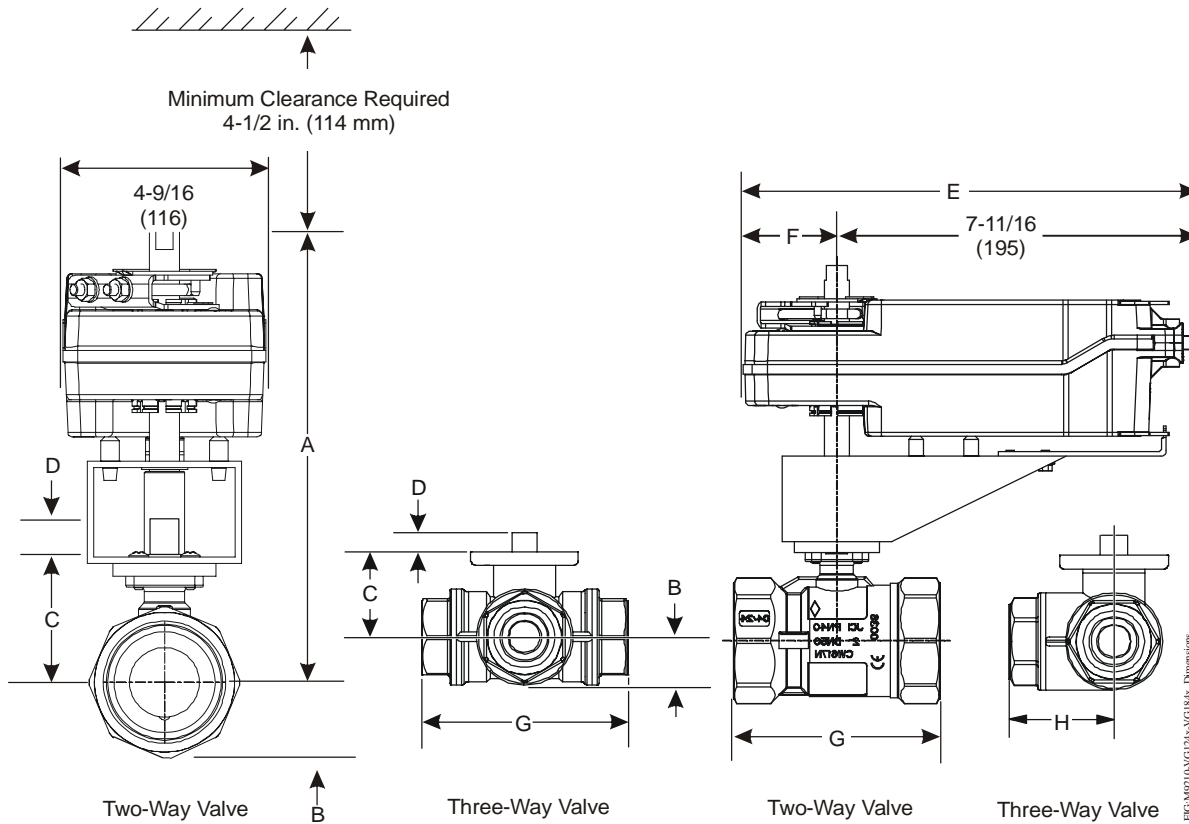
M9210 Actuated Ball Valve Dimensions, in. (mm)
